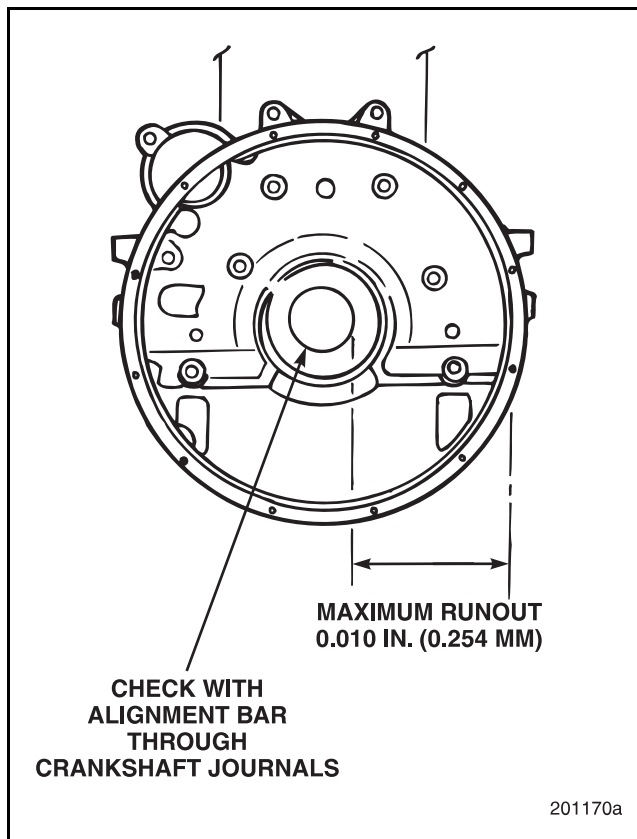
Flywheel Housing Runout Check with Alignment Bar
